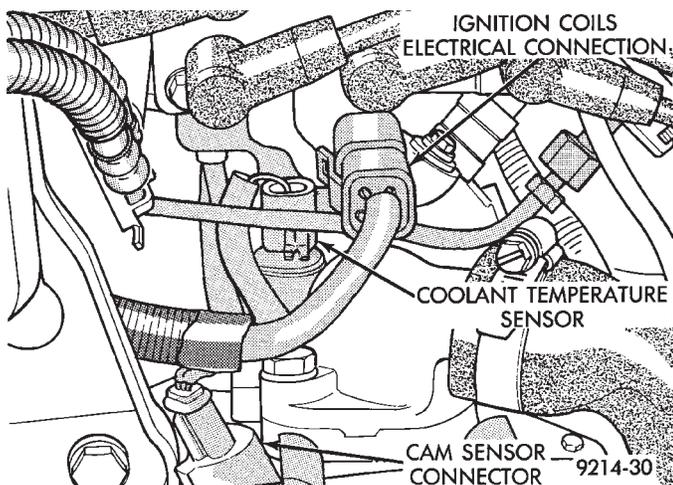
Coolant Temperature Sensor—3.3L and 3.8L Engines
